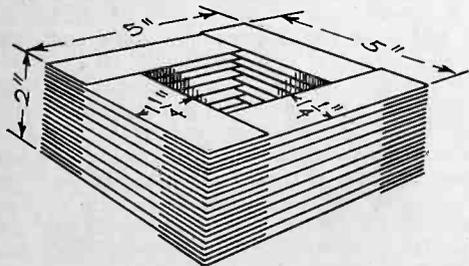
Dimensions of Core for Battery Charger Transformer.
